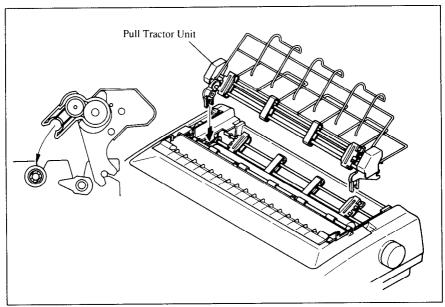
Mount the Pull Tractor Unit onto the printer.
